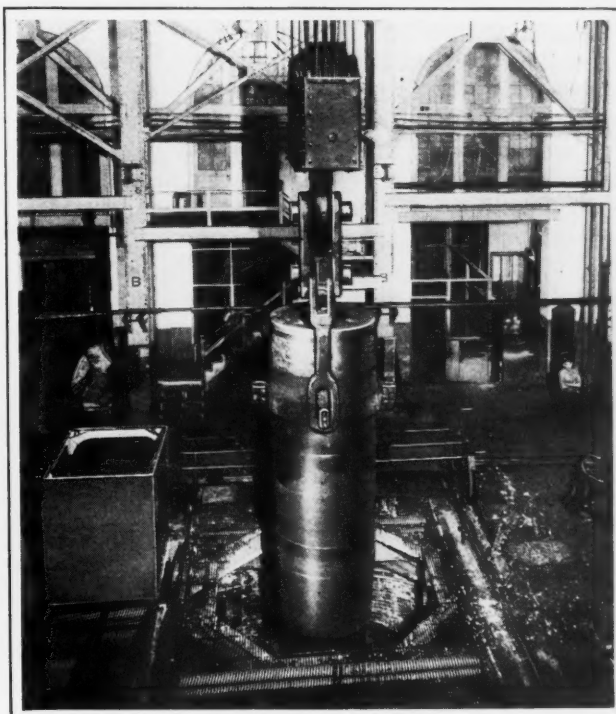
Close-up View of the Shrinkage Pit and a Partially Lowered Gun
